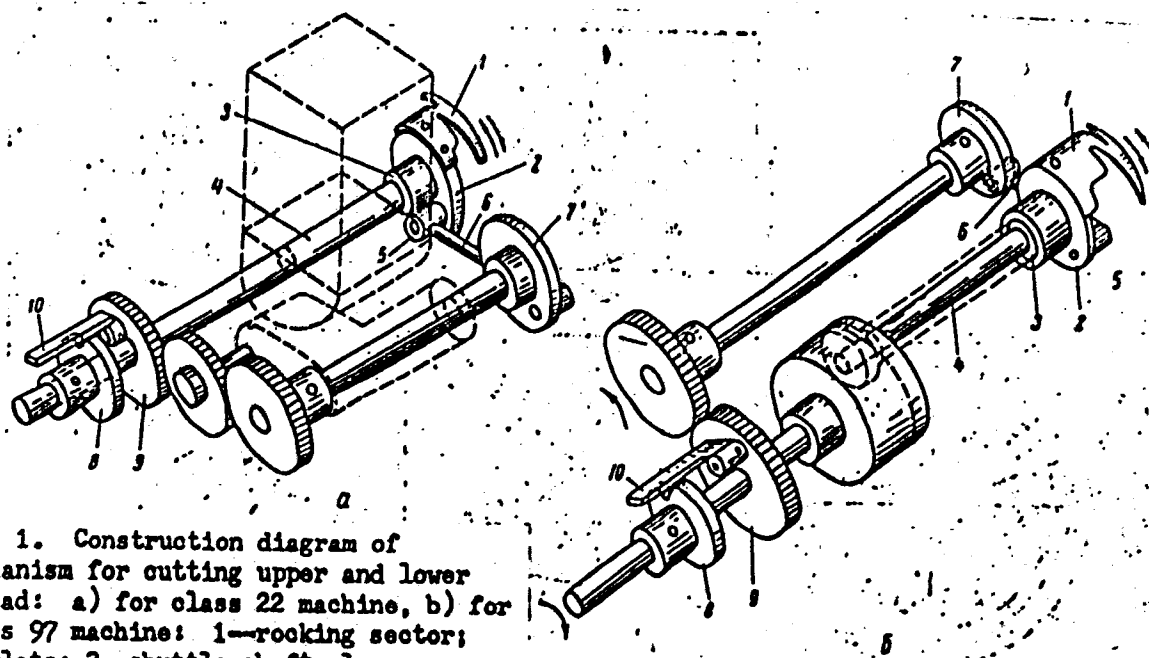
Construction diagram of mechanism for cutting upper and lower thread: a) for class 22 machine, b) for class 97 machine: 1--rocking sector; 2--plate; 3--shuttle shaft sleeve; 4--shuttle shaft; 5--rocking plate pin; 6--guide; 7--crank; 8--disk for engaging cutting mechanism; 9--cutting mechanism engaging pin; 10--engaging catch.
